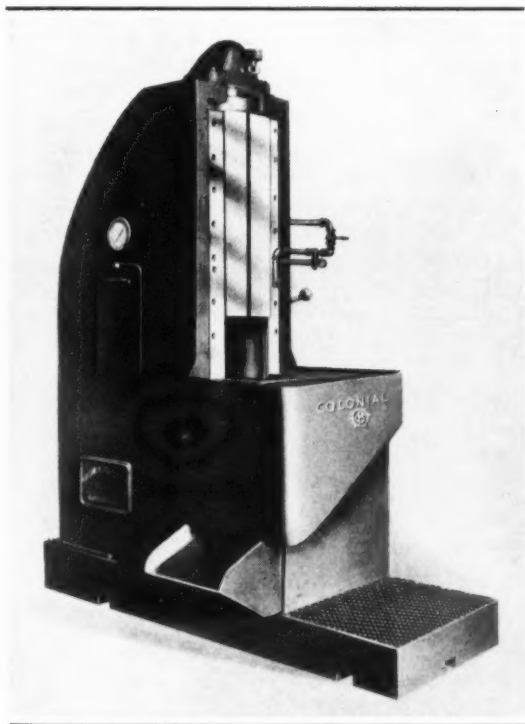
Colonial Single-ram Surface Broaching Machine which is Built in Eleven Sizes with Capacities of from 6 to 25 Tons
